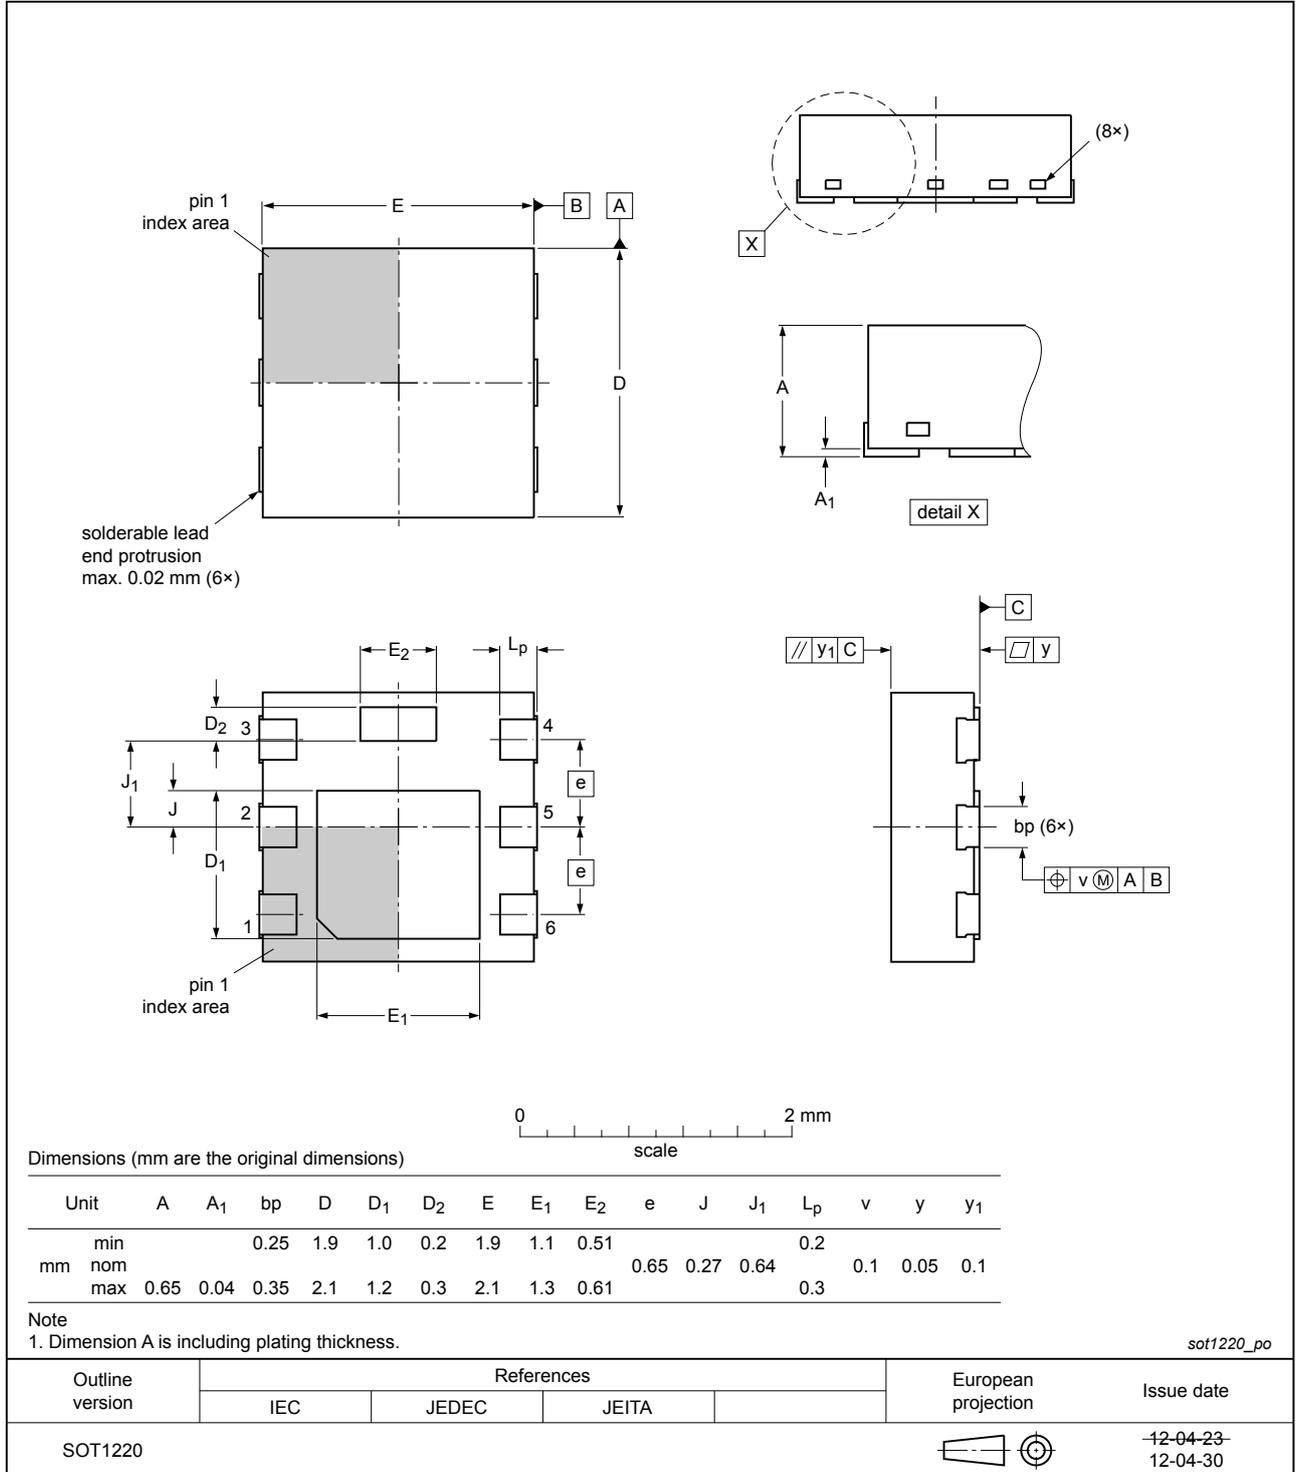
Package outline DFN2020MD-6 (SOT1220)
